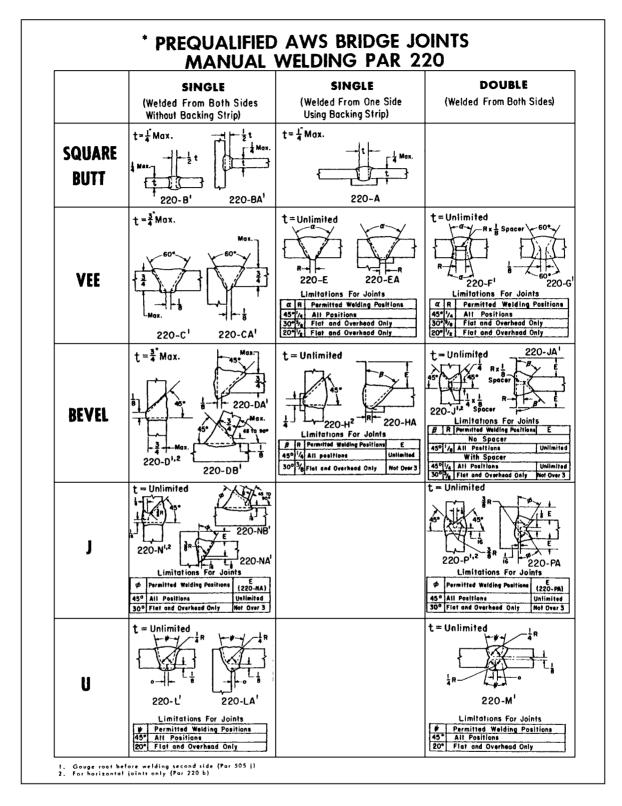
American Welding Society (AWS)—manual and automatic welding
